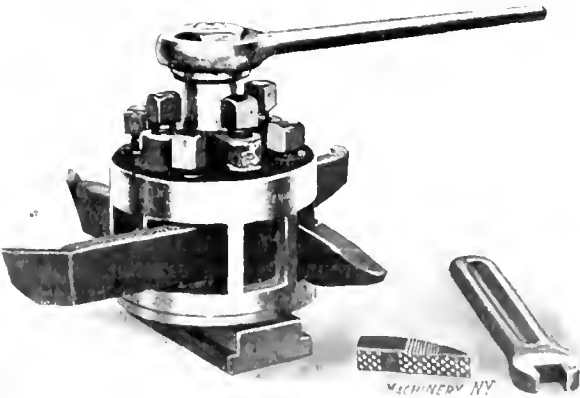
Brewer Multiple Tool-holder for the Engine Lathe
